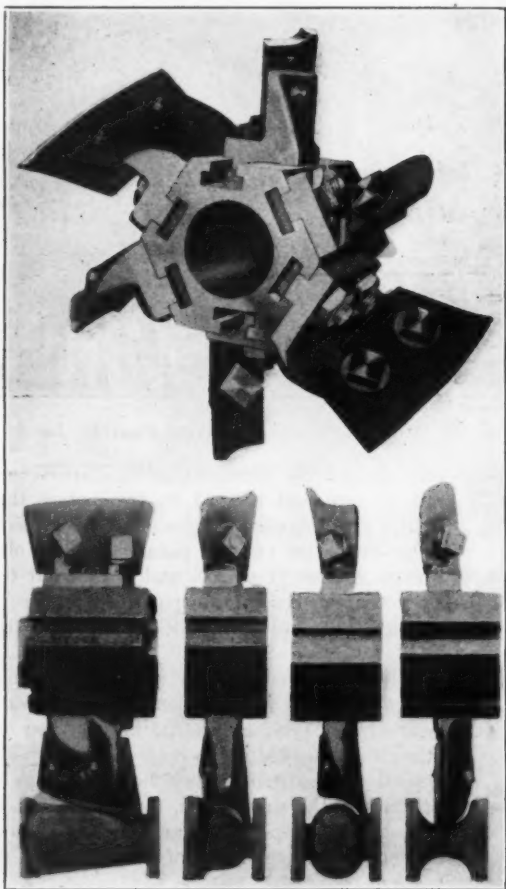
T-SLOT-TYPE RADIAL CUTTER HEADS USED ON AUTOMATIC SHAPING LATHE
